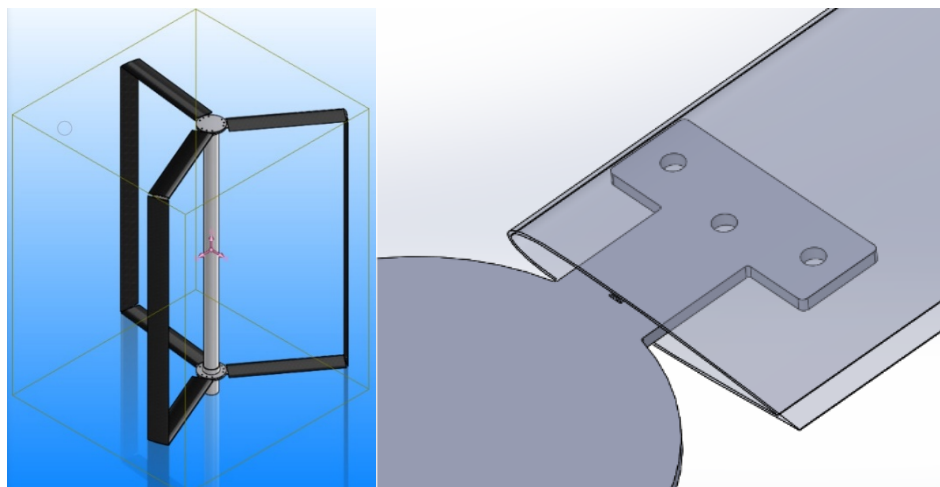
Baseline rotor assembly with metal mounting bracket detail
